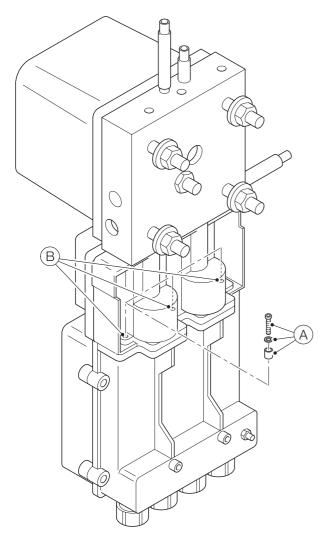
Securing the Smart Electronics assembly to the SMA90 housing
